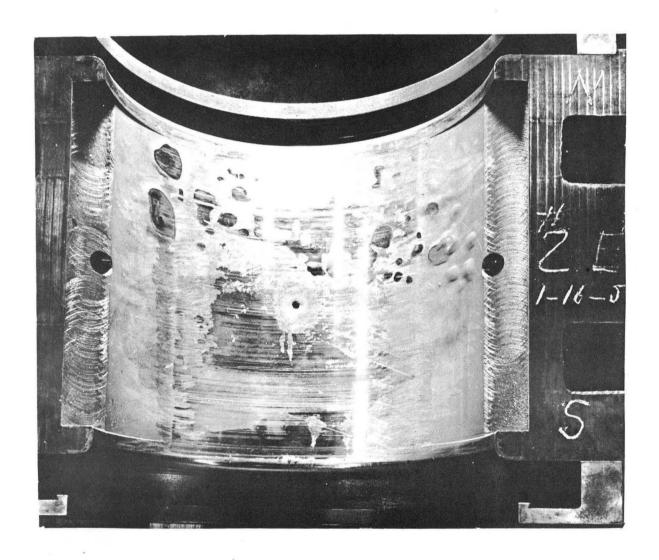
Bottom half of bearing between generator and flywheel, east machine.
